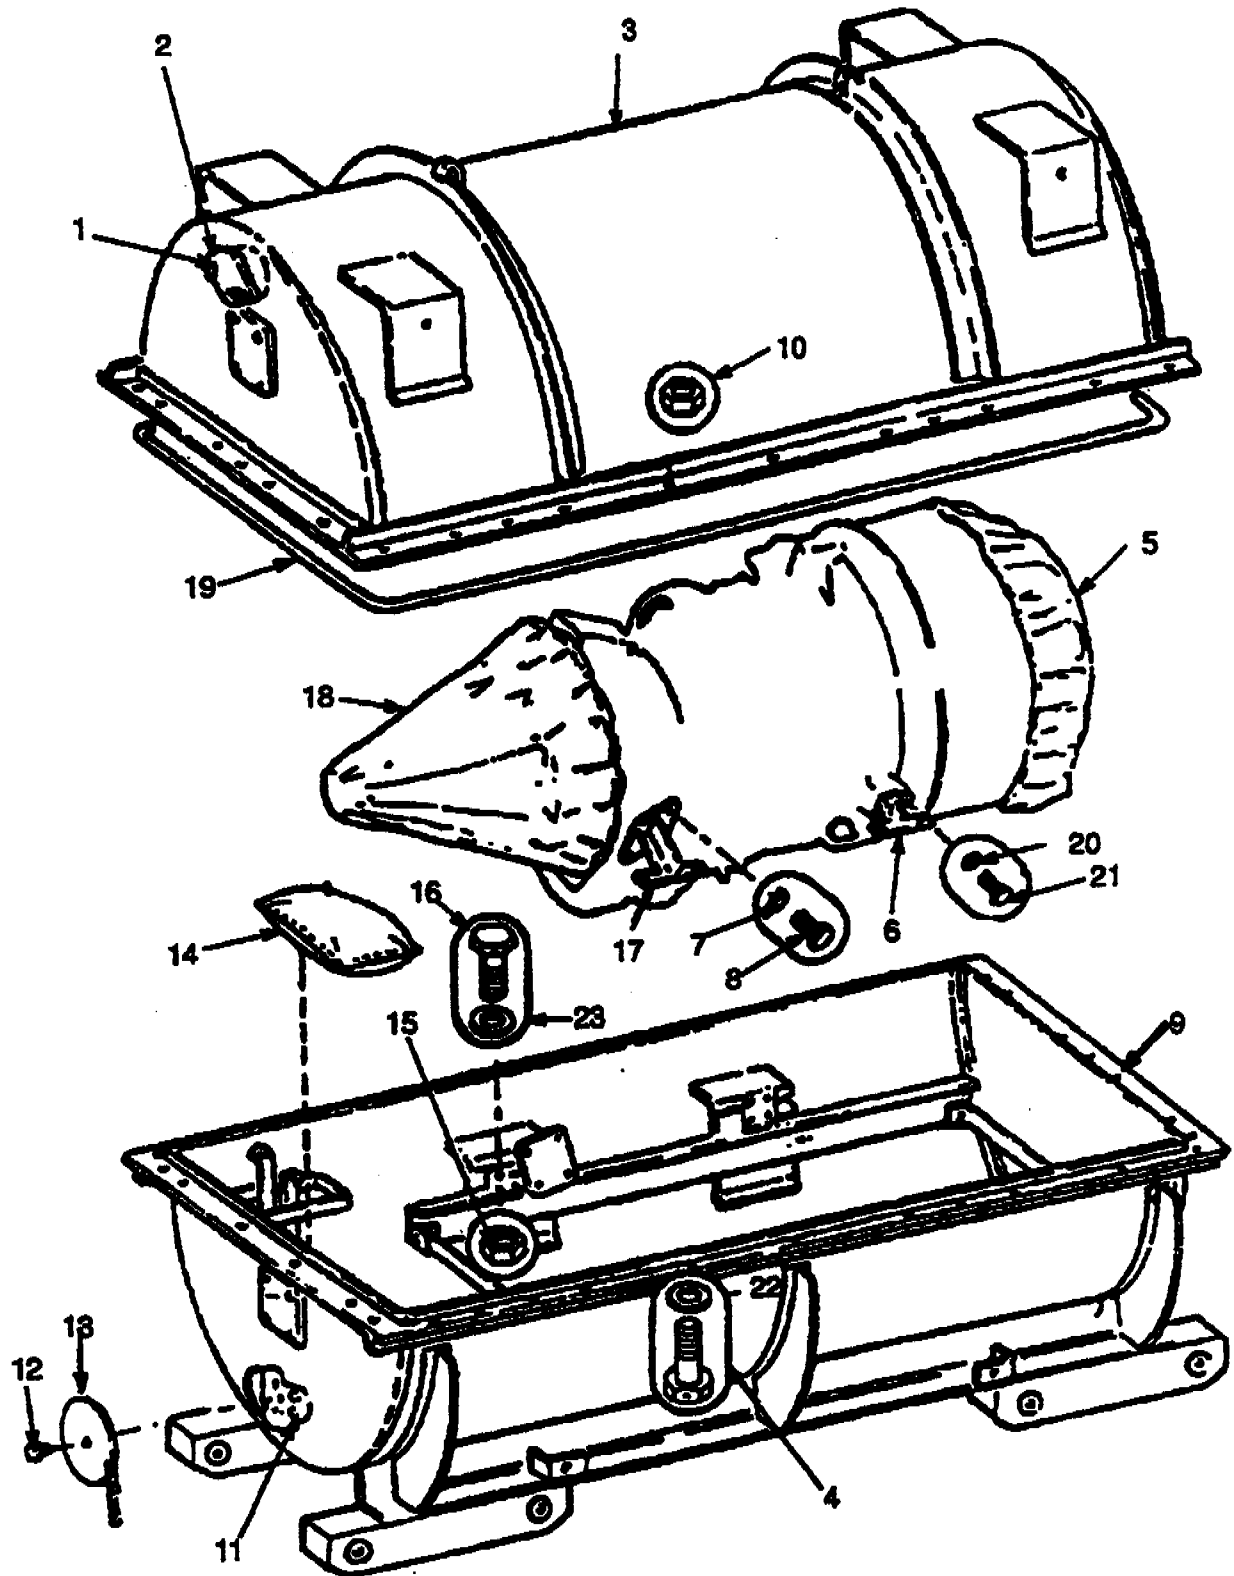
Engine Shipping Container and Attaching Parts (Typical).
